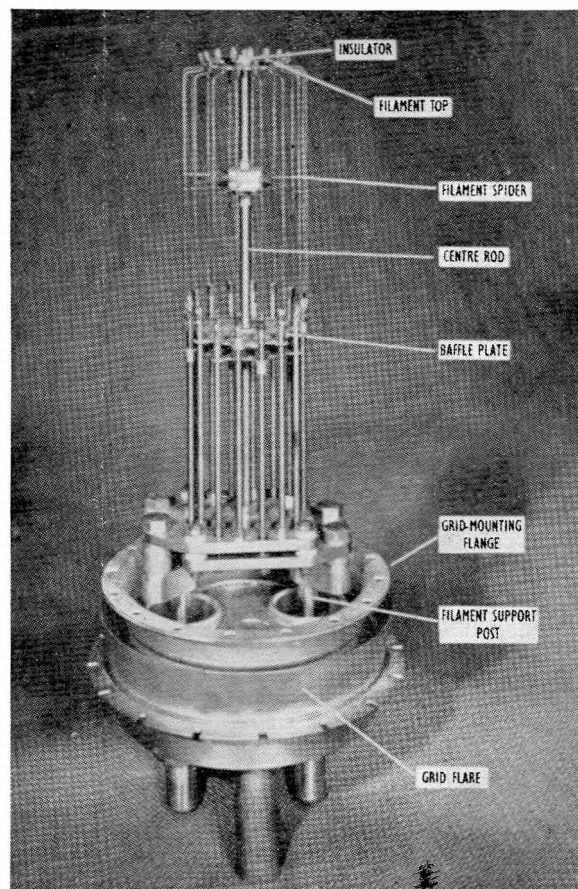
Modern type of filament assembly used in valves for radio-frequency heating.
